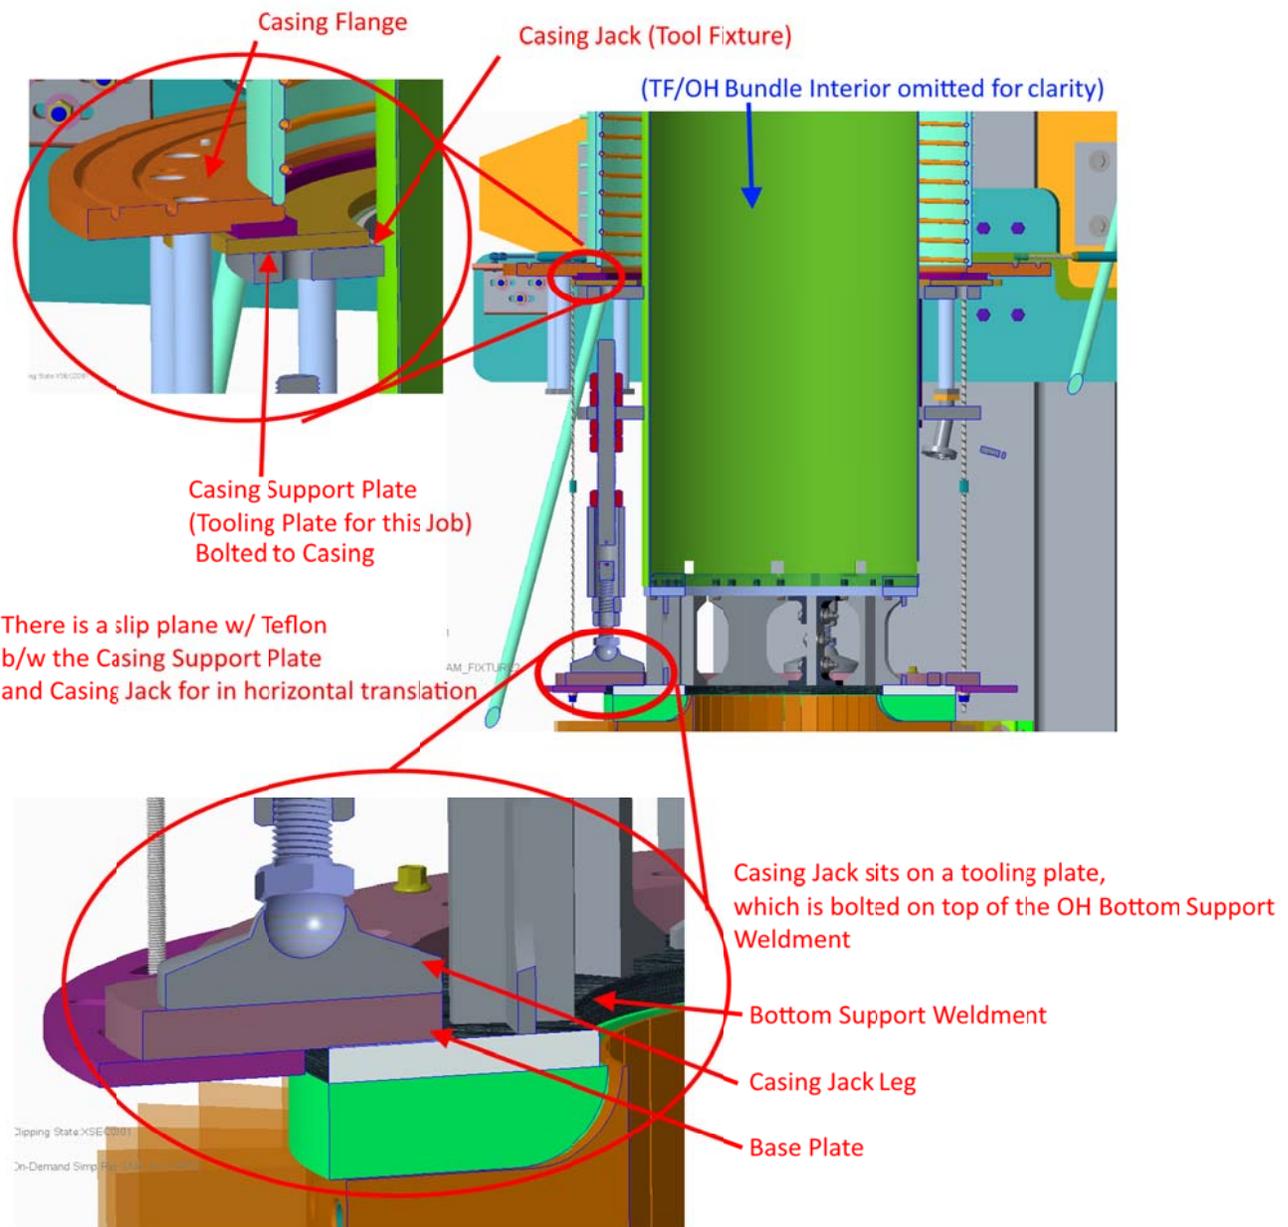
Cross section showing tooling fixture installed on TF/OH Bundle and Interface with Casing
